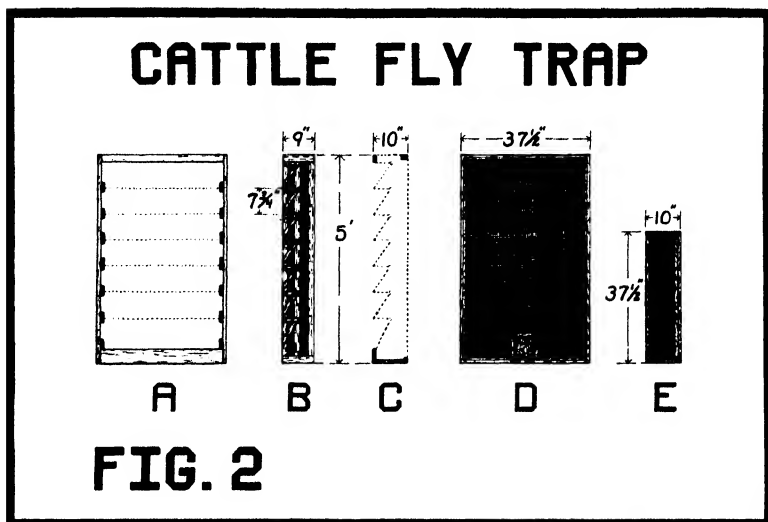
Drawings of trapping element: A, Front view; B, interior view of one end showing construction of Z's for screen wire; C, cross section; D, back view (note door for removing dead flies); E, top view.
